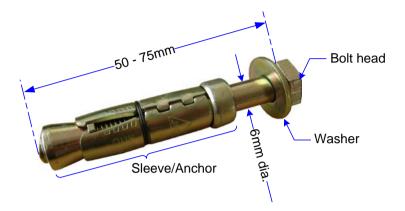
M6 Rawlbolt – recommended for wallmount.
